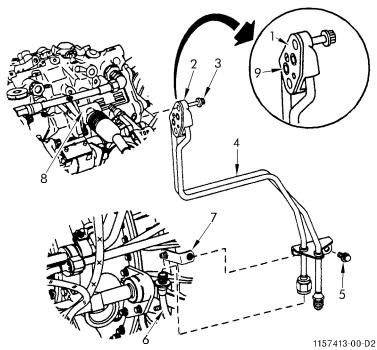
(T701, T701C, T701D) Overspeed and Drain Valve (ODV) Manifold Assembly; Removal, Inspection, and Installation
